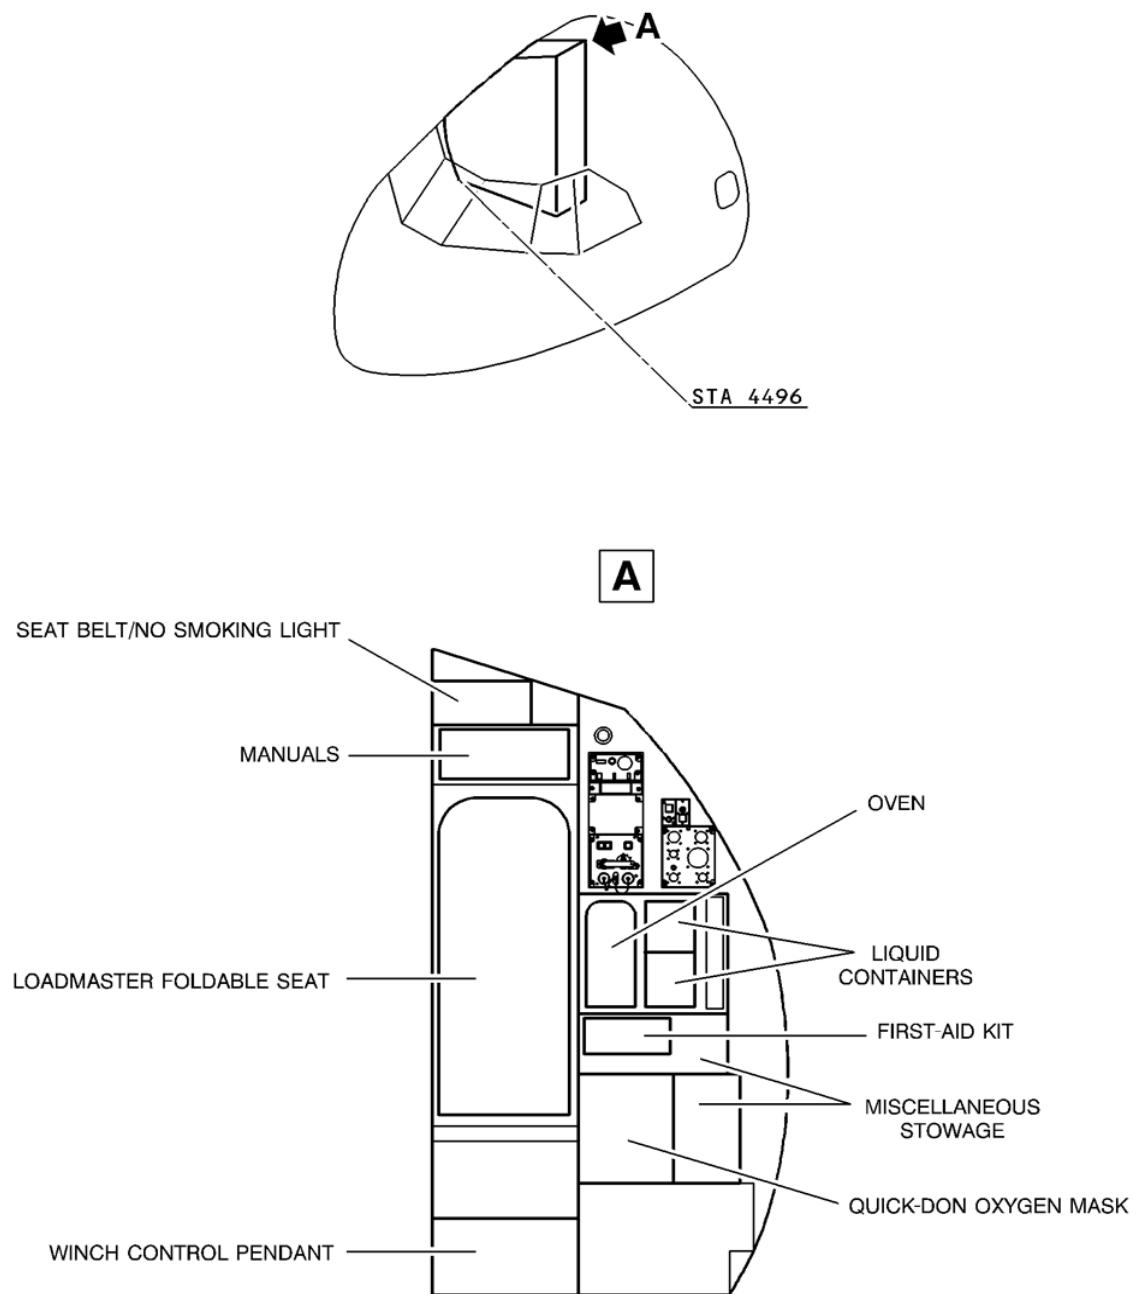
Miscellaneous equipment and storage provisions (Sheet 1 of 4)
